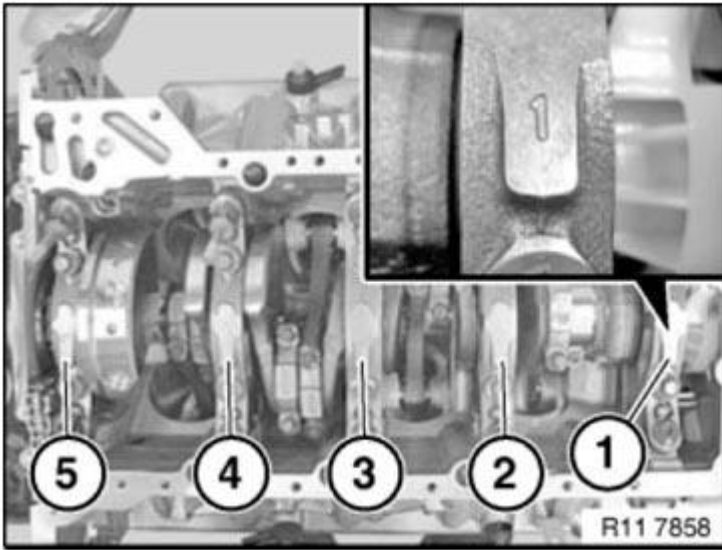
Identifying Main Bearing Caps Marked Numbers
